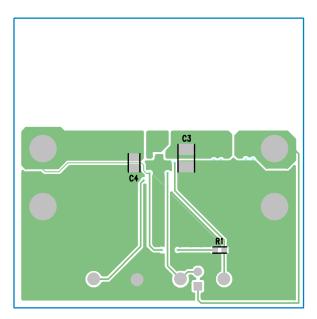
NCV890430MWxxGEVB PCB Layout - Bottom (mirrored)
